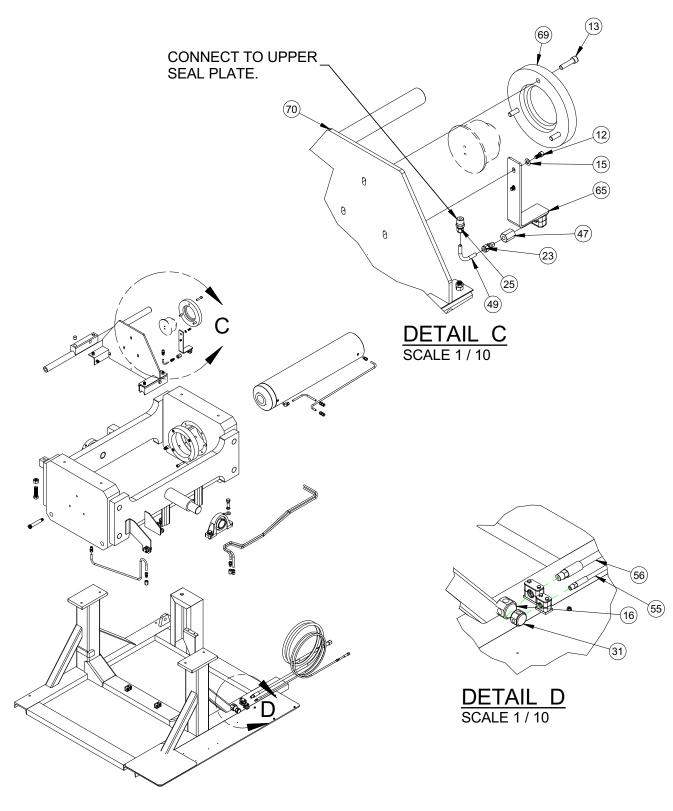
USV-16-200T ASSEMBLY DETAIL C AND D 1 (P/N 91593)
